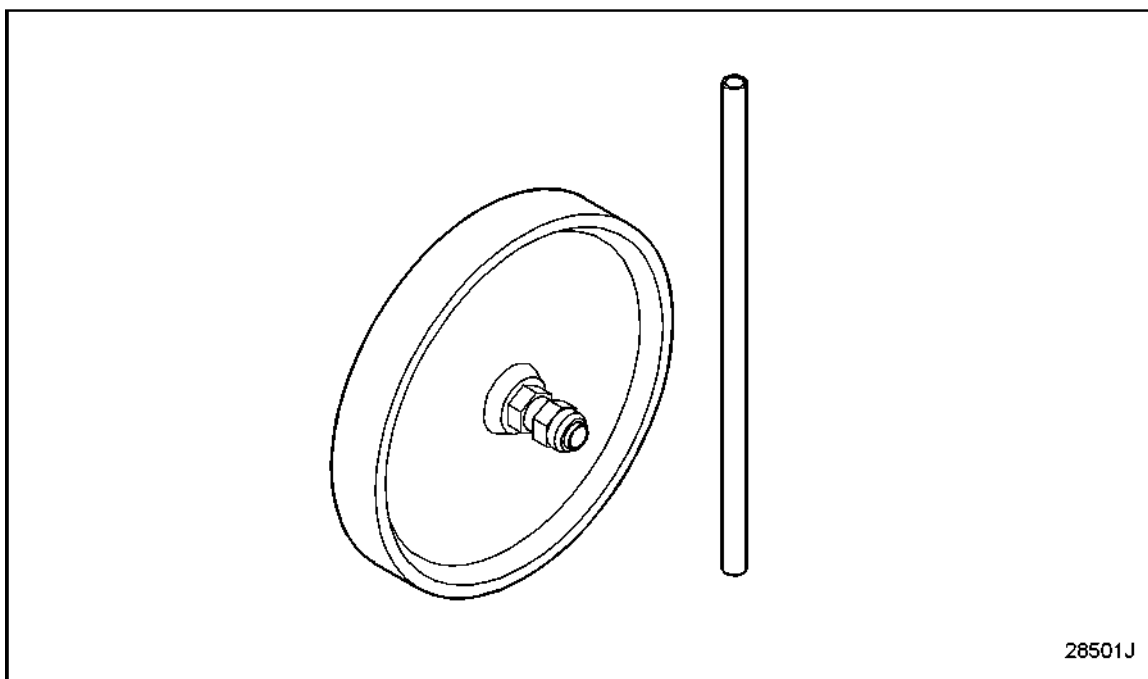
Front Crankshaft Cup Plug Tester,J 34728
